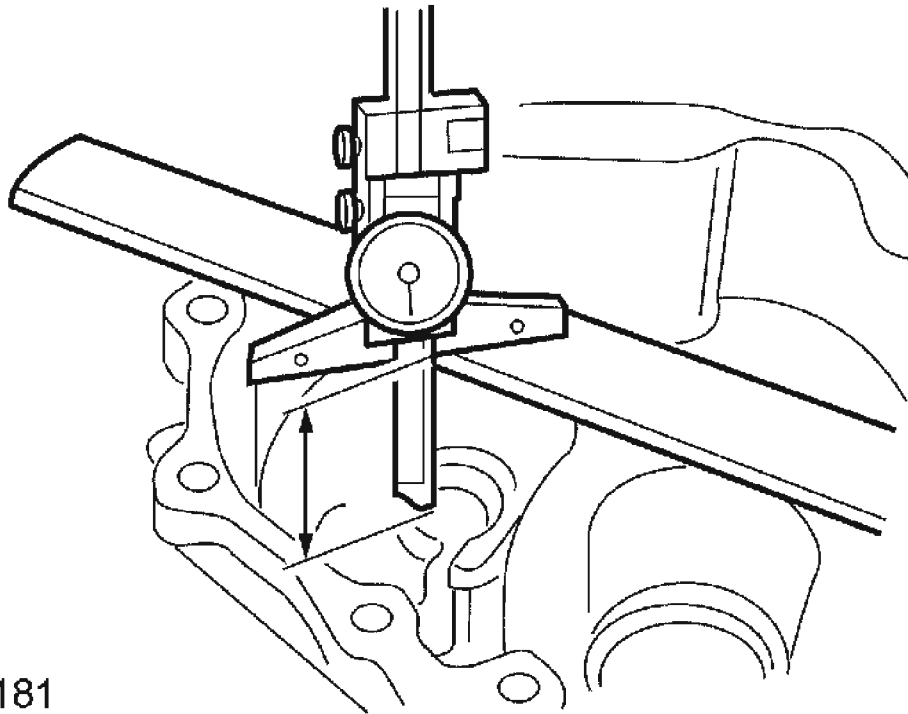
Measuring And Record Depth From Mating Surface Of Clutch Housing To Input Shaft Bearing
